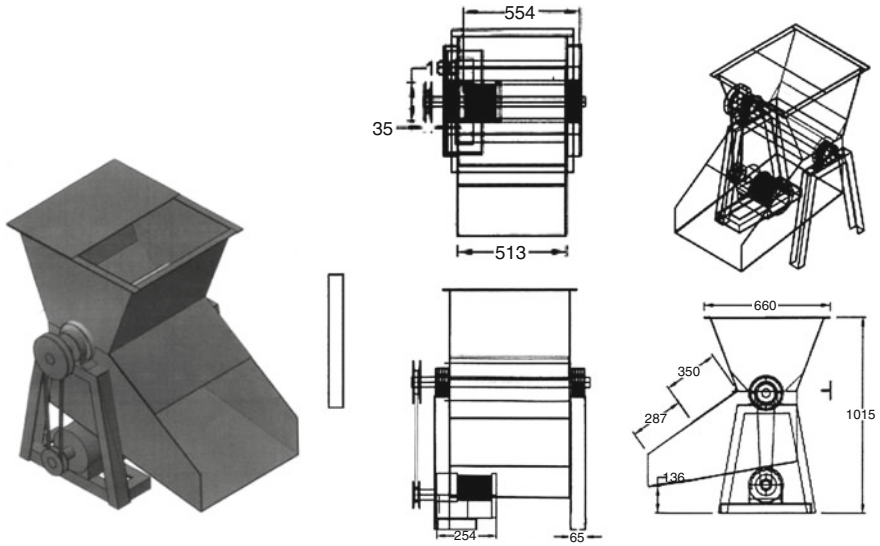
The designed Akpu (Cassava) milling machine in Solid Drawing/Technical view
